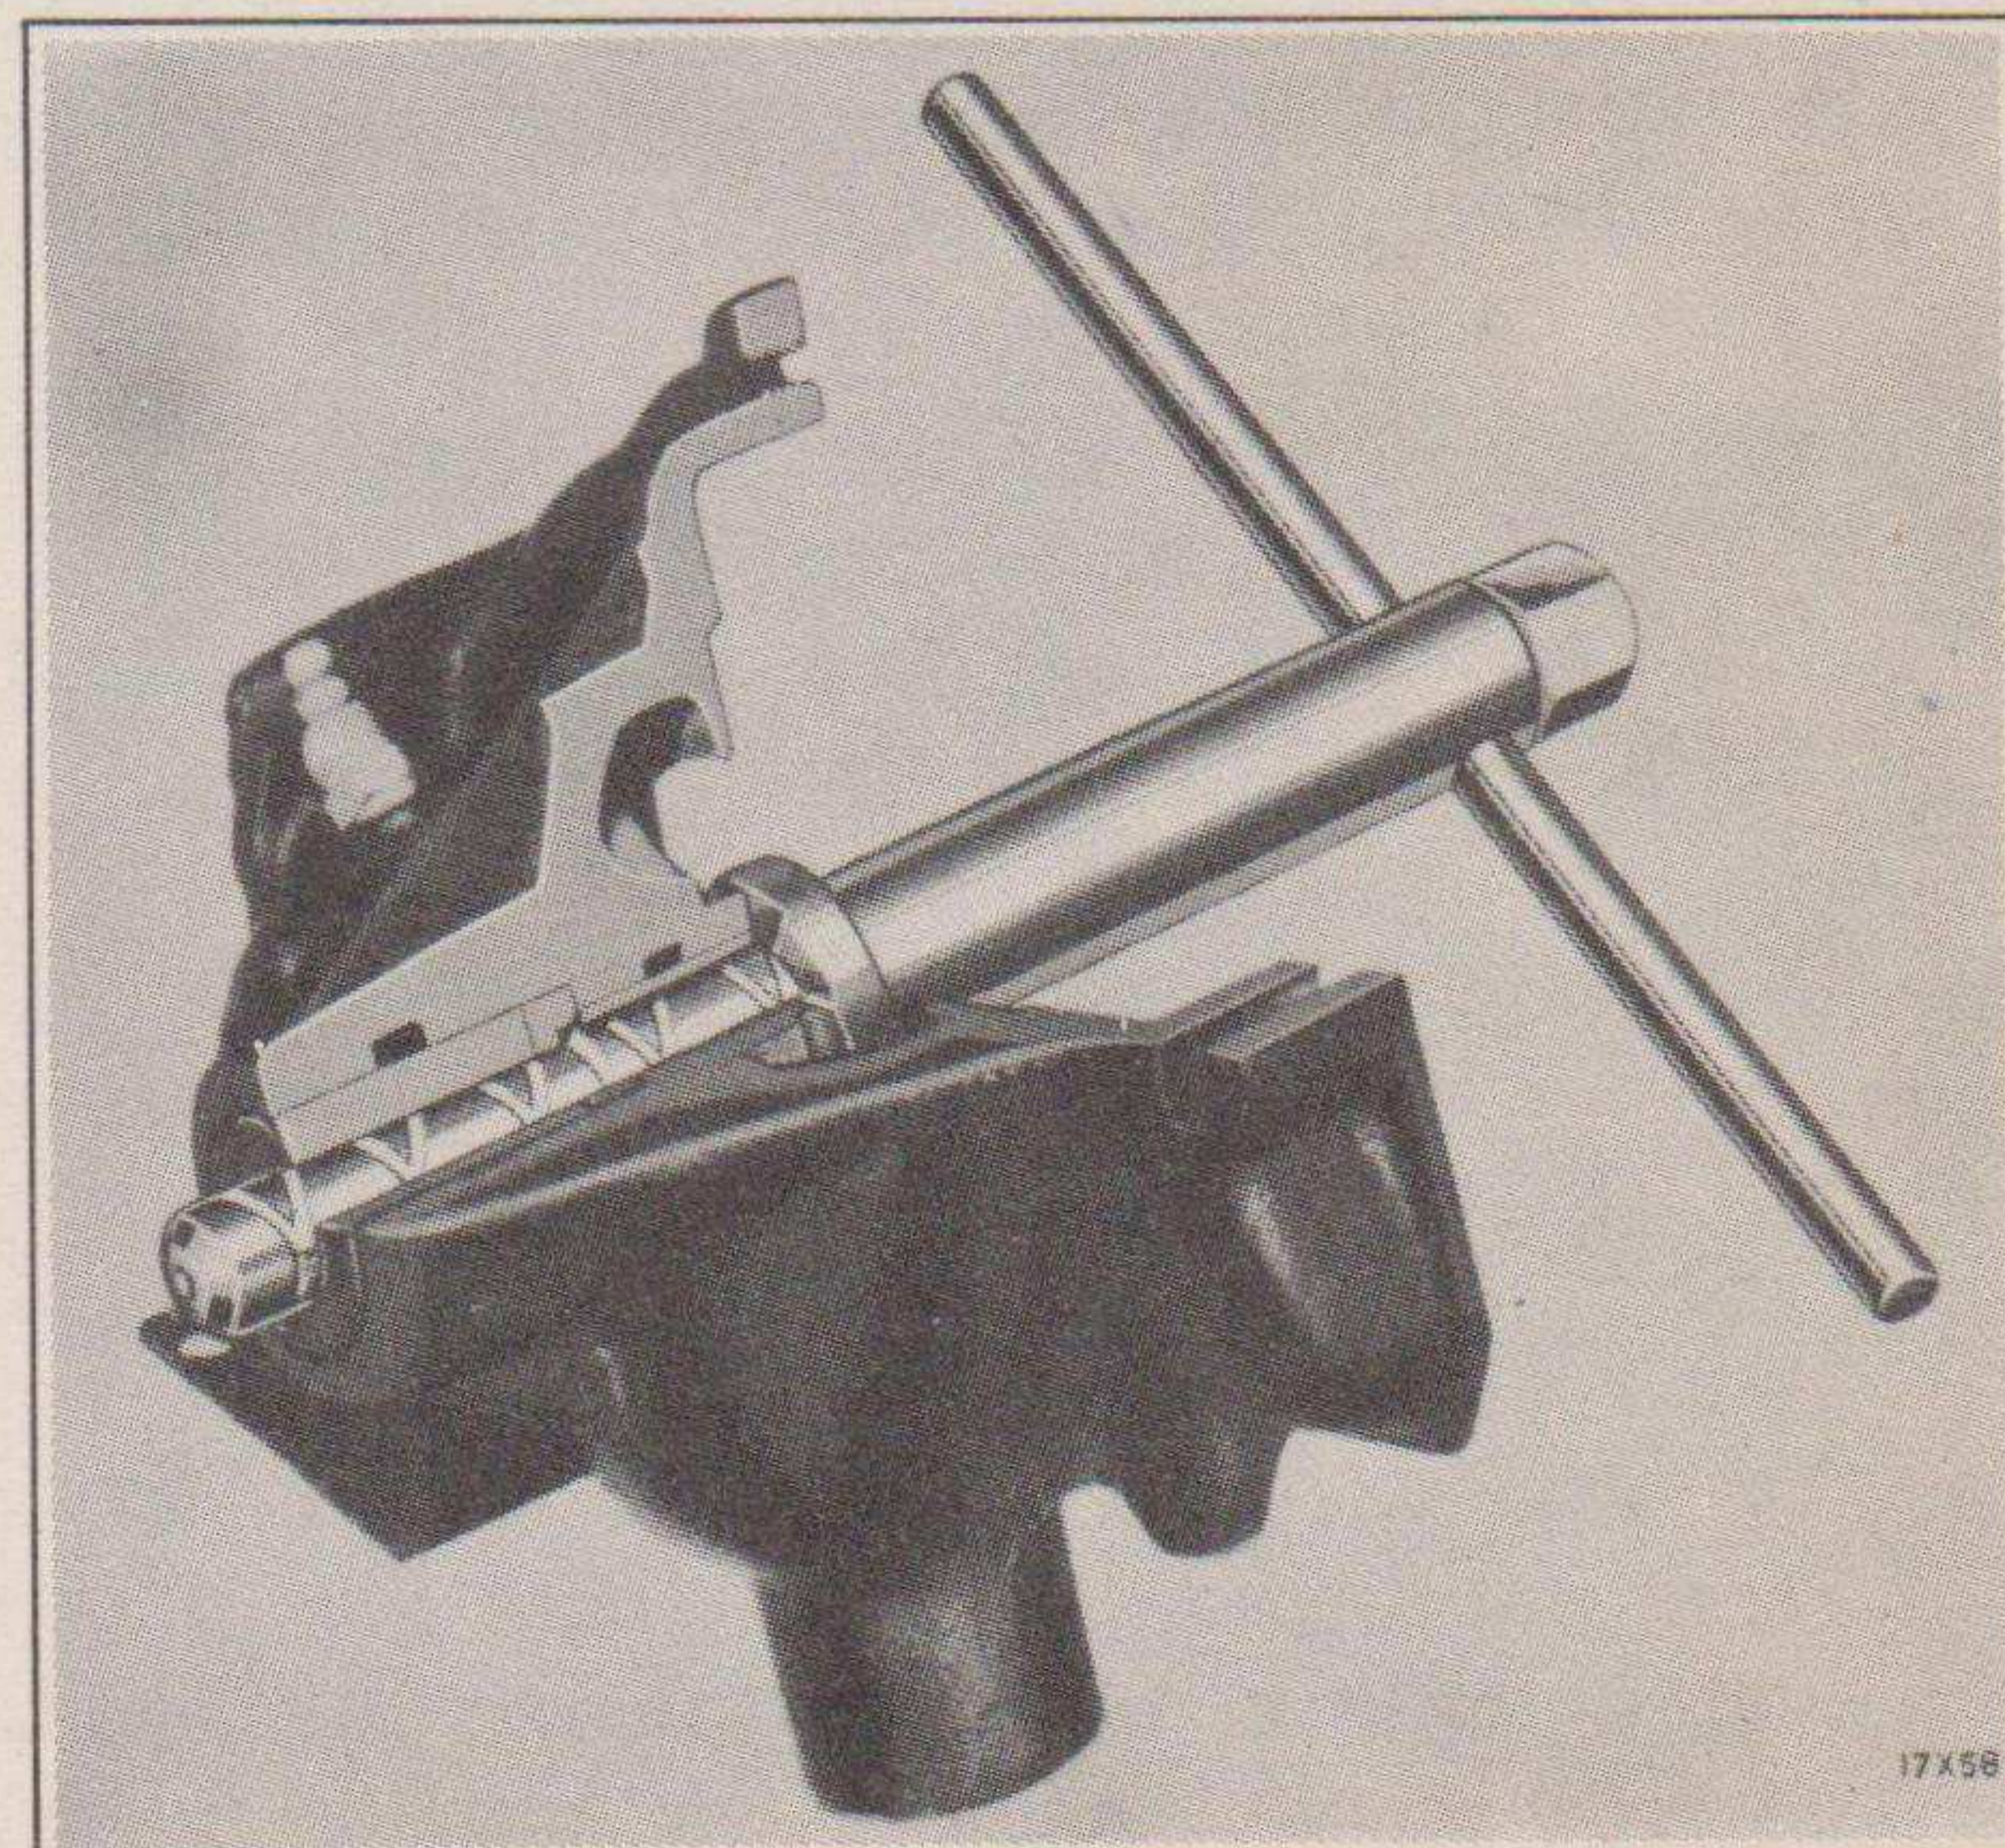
Line Burnishing Bushings and Facing the Housing
